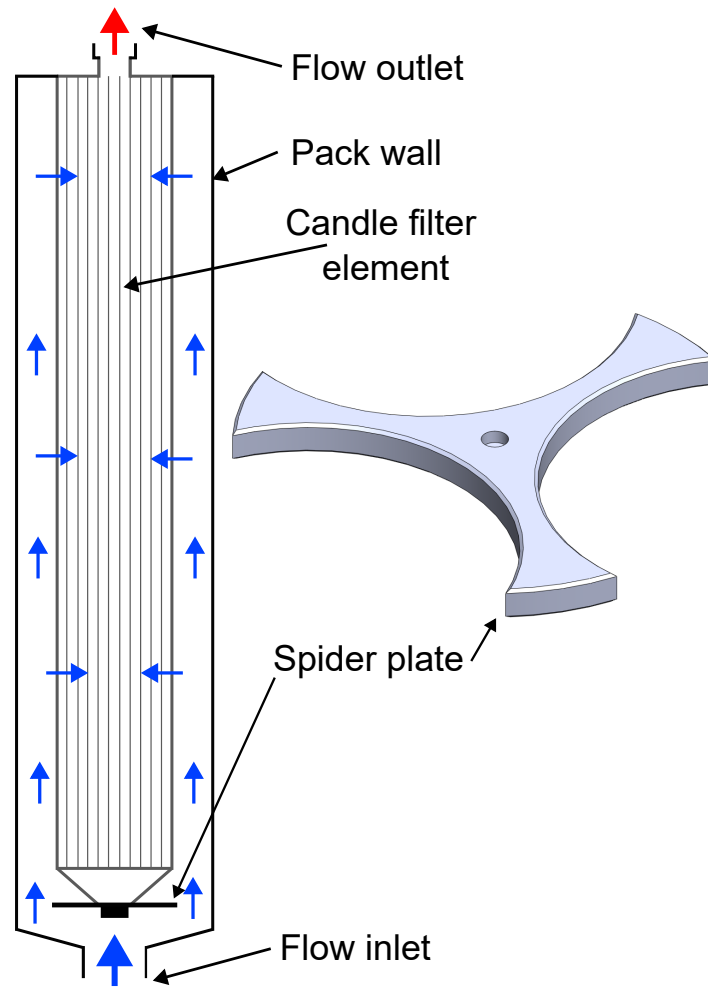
Cross-sectional sketch of a single candle filter pack and a 3D model of the spider plate.
